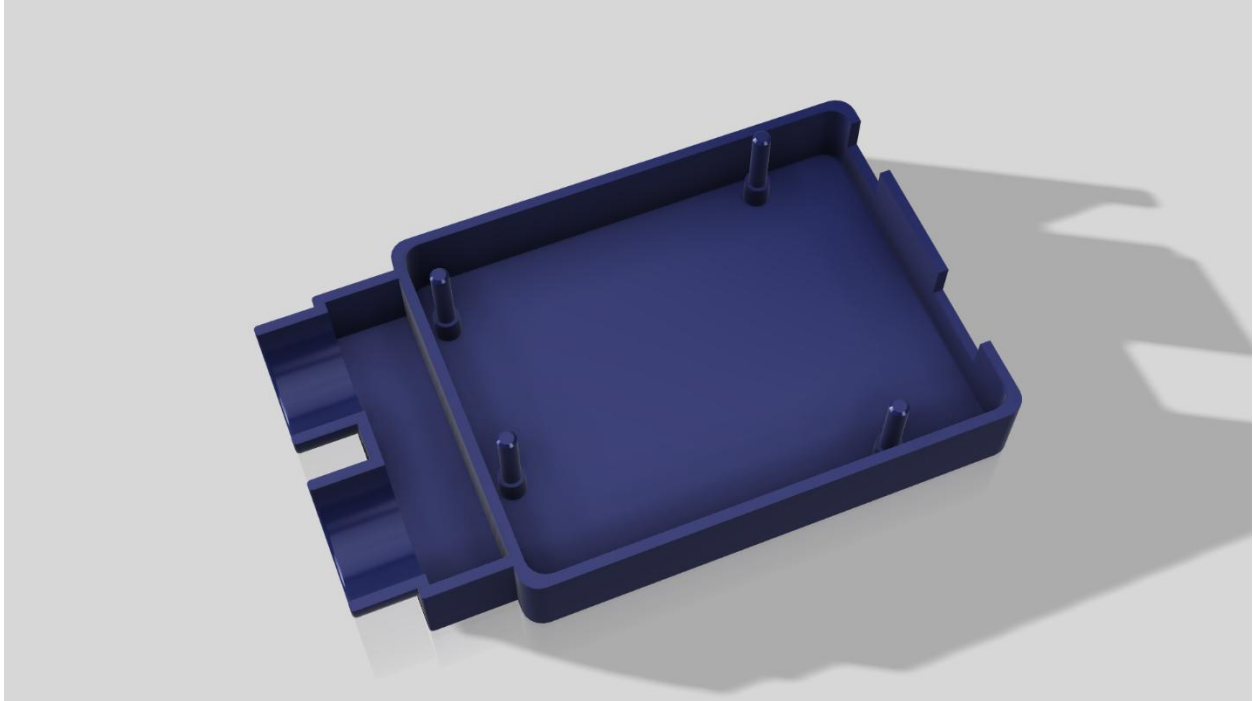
3D model of the bottom part of the enclosure highlighting mounting pins
